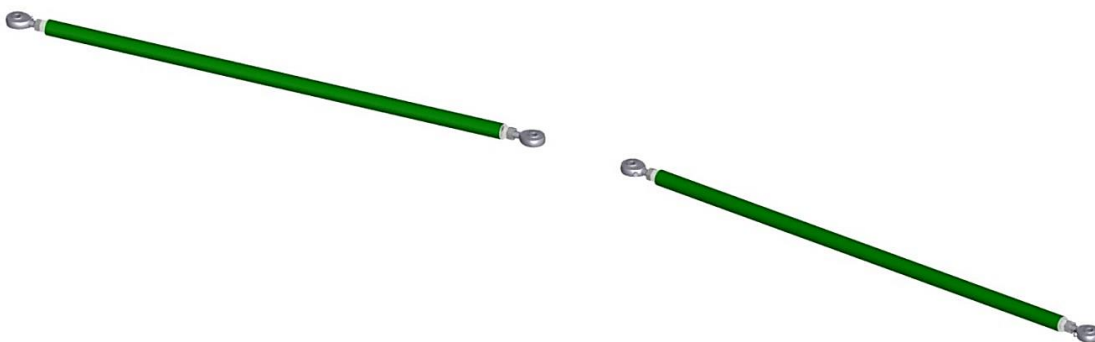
Tie rods (Final CAD Drawing, CATIA V5)
